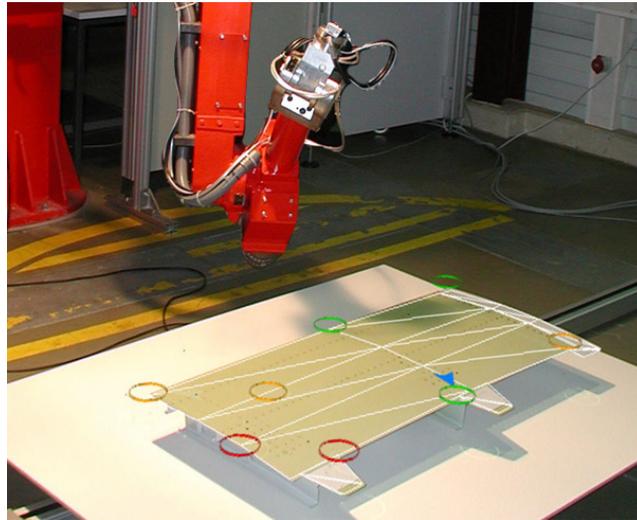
Service person's augmented view on questionable soldering points on airplane part.
